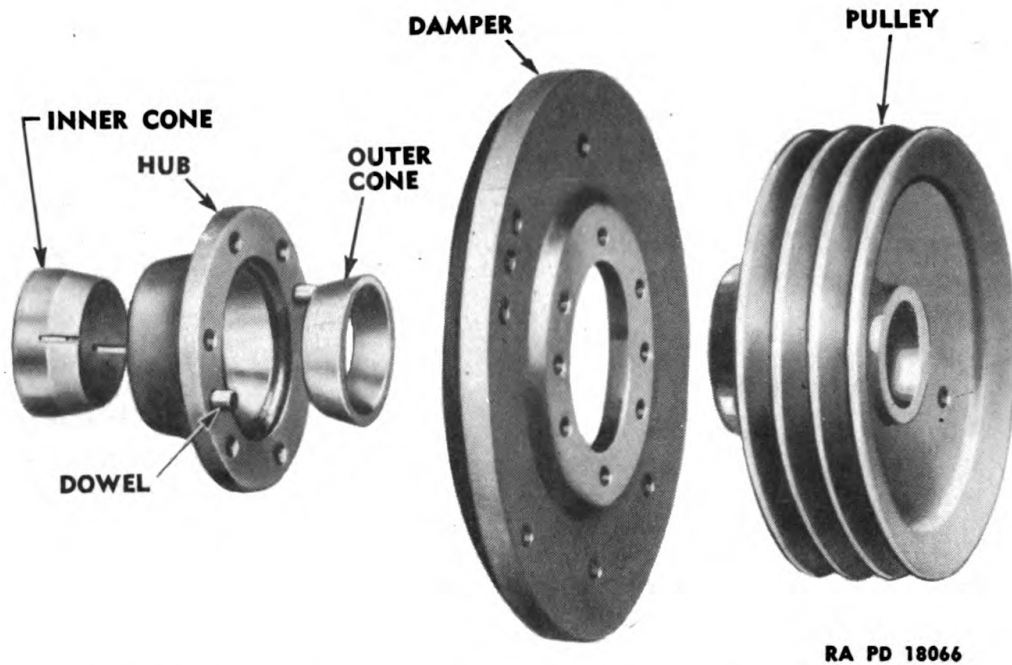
Relative Location of Parts on Front End of Crankshaft
